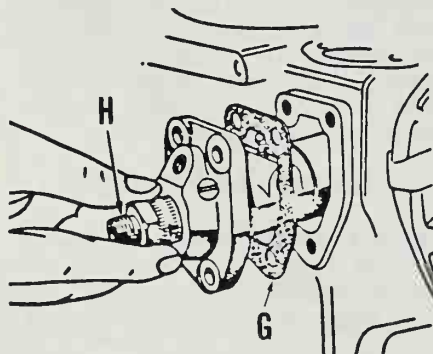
View showing fuel injection pump timing shim gaskets (G) and delivery valve holder (H).
